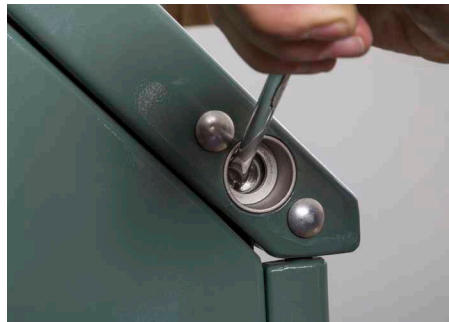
Rotate the actuator with a screwdriver until the latching mechanism closes.
